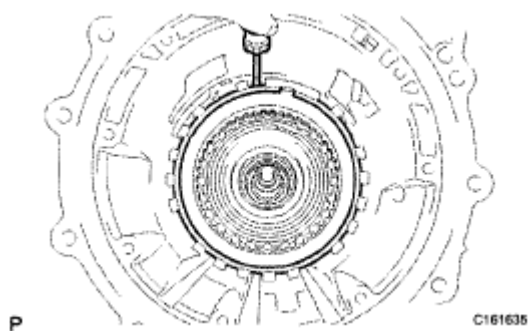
Removing No. 3 Brake Snap Ring From Transmission Case
